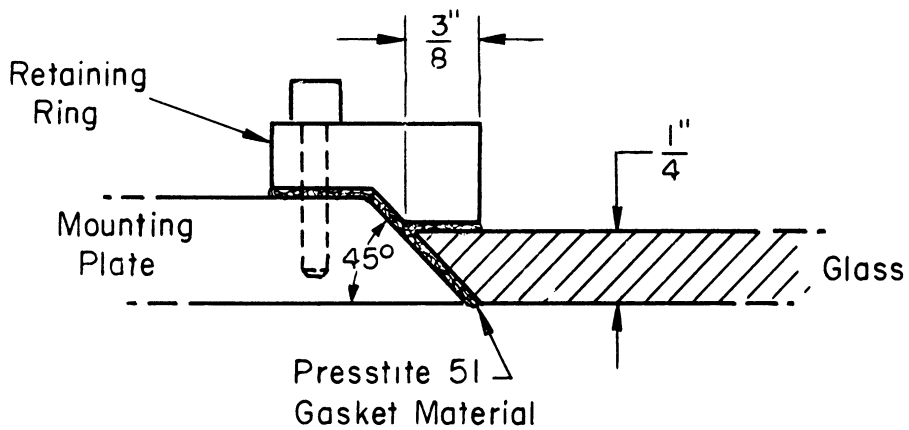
(b). Cutaway view of mounting of 8" x 8" x 1/4" glass specimens.
